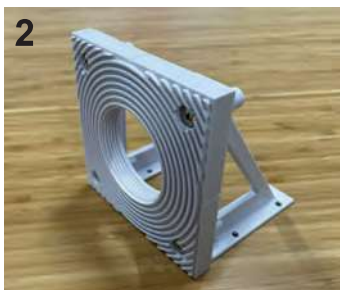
Attach the two included mounting brackets to the platform using the included mounting bracket screws (4).
